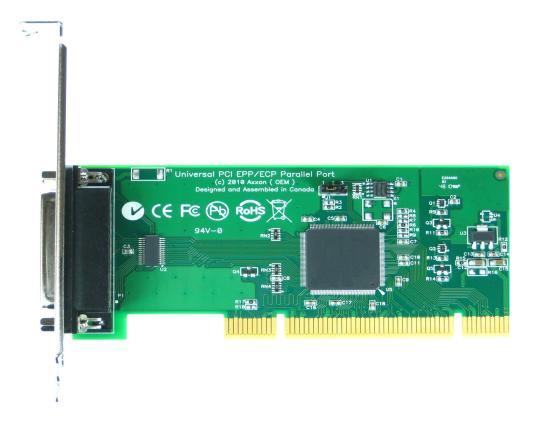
Current photo of Axxon LF616KB Rev B Universal PCI Bus Adapter Card
